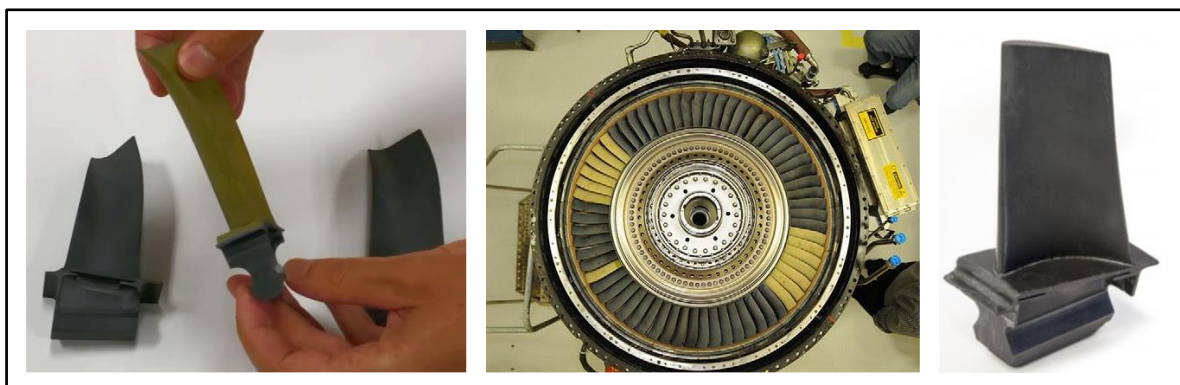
Uncooled prepreg-MI LPT blades for F414 engine manufactured by GE (left) [27]
